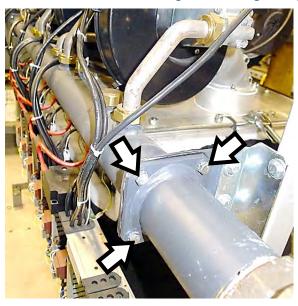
Uninstall Gas Collector Flange from Gas Supply Piping (Step 13)
